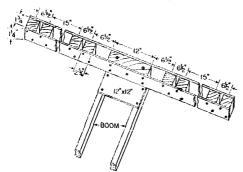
Sketch showing the detail dimensions of the element supports mounted at each end of the boom. Drawing is not to scale.
